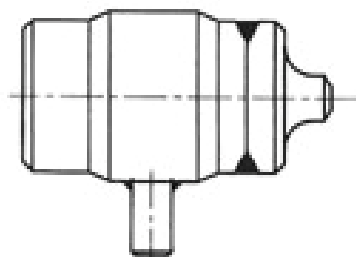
Condensate pots, Dimensions $\varnothing$ 3.54 x 0.69 inches (90 x 17,5 mm) with weld sockets 0.84 inches (21,3 mm)
